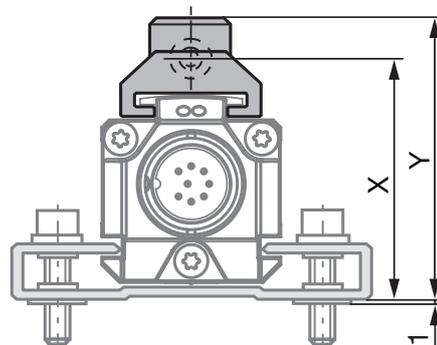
Dimensions and distances with BTL5-M/N-2814-1S magnet
